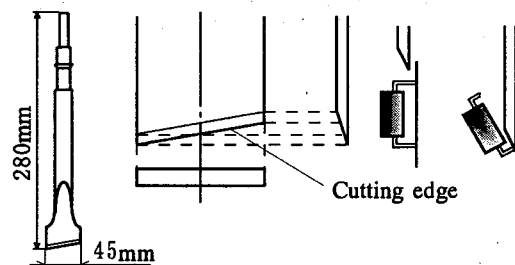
Shape of disassembly tool to cut off connection pin of IC-chip
